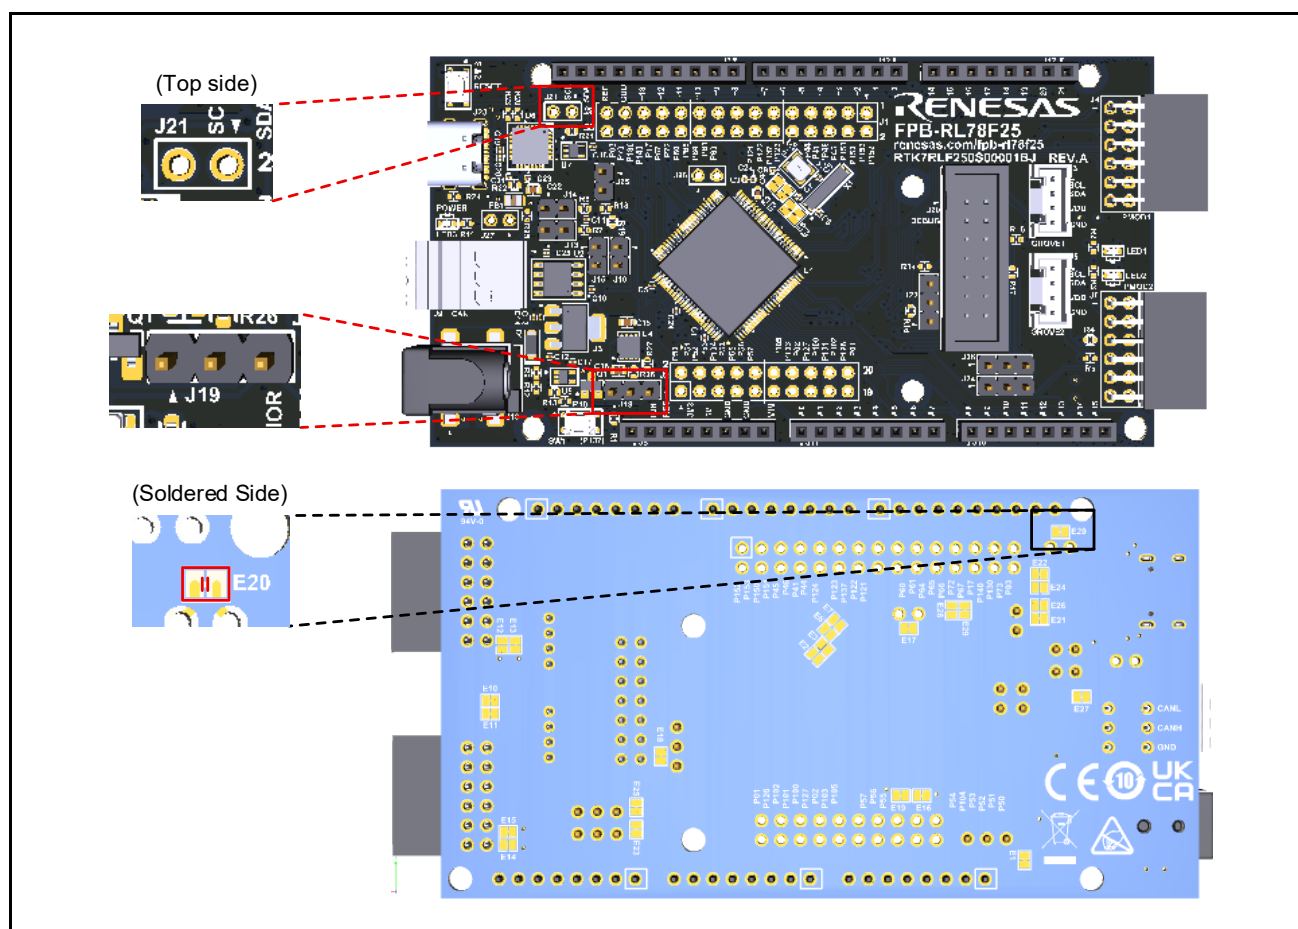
Assignments of Jumper Connector (J19, J21) and Jumper Solder (E20)
